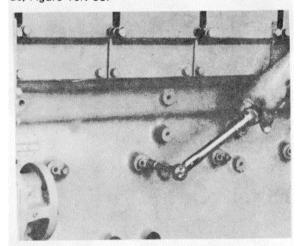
N-53. Tighten the Piston Cooling Nozzle Screw ROCKER HOUSINGS/WATER MANIFOLD
